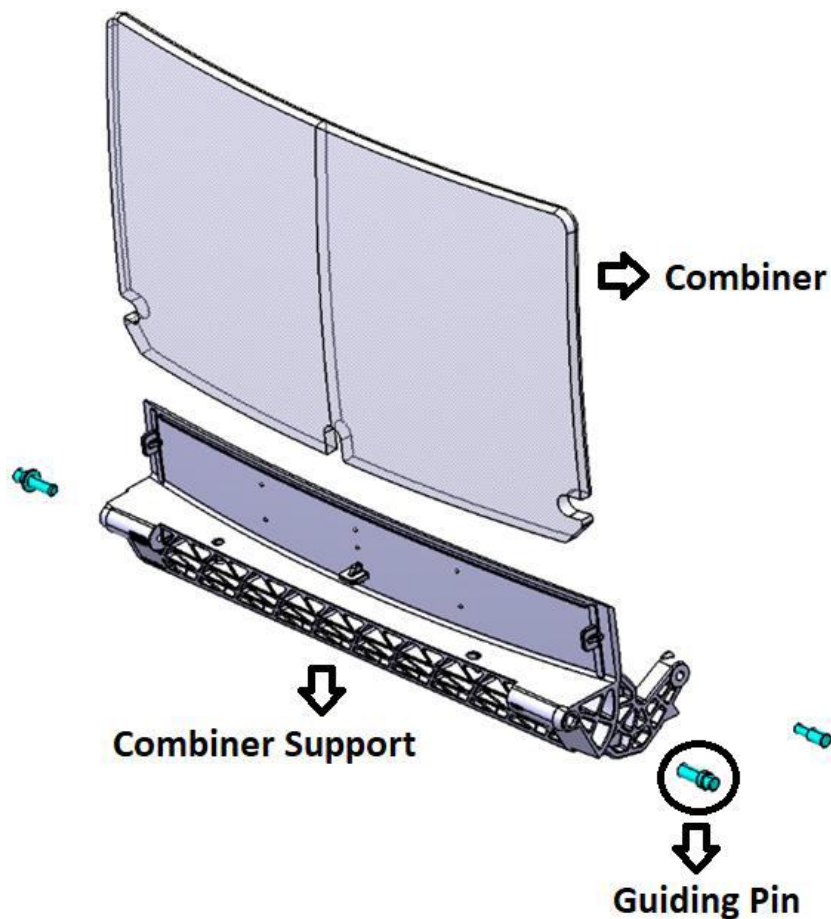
FORD CHUD Combiner Unit Exploded View (Almeida, 2019)
